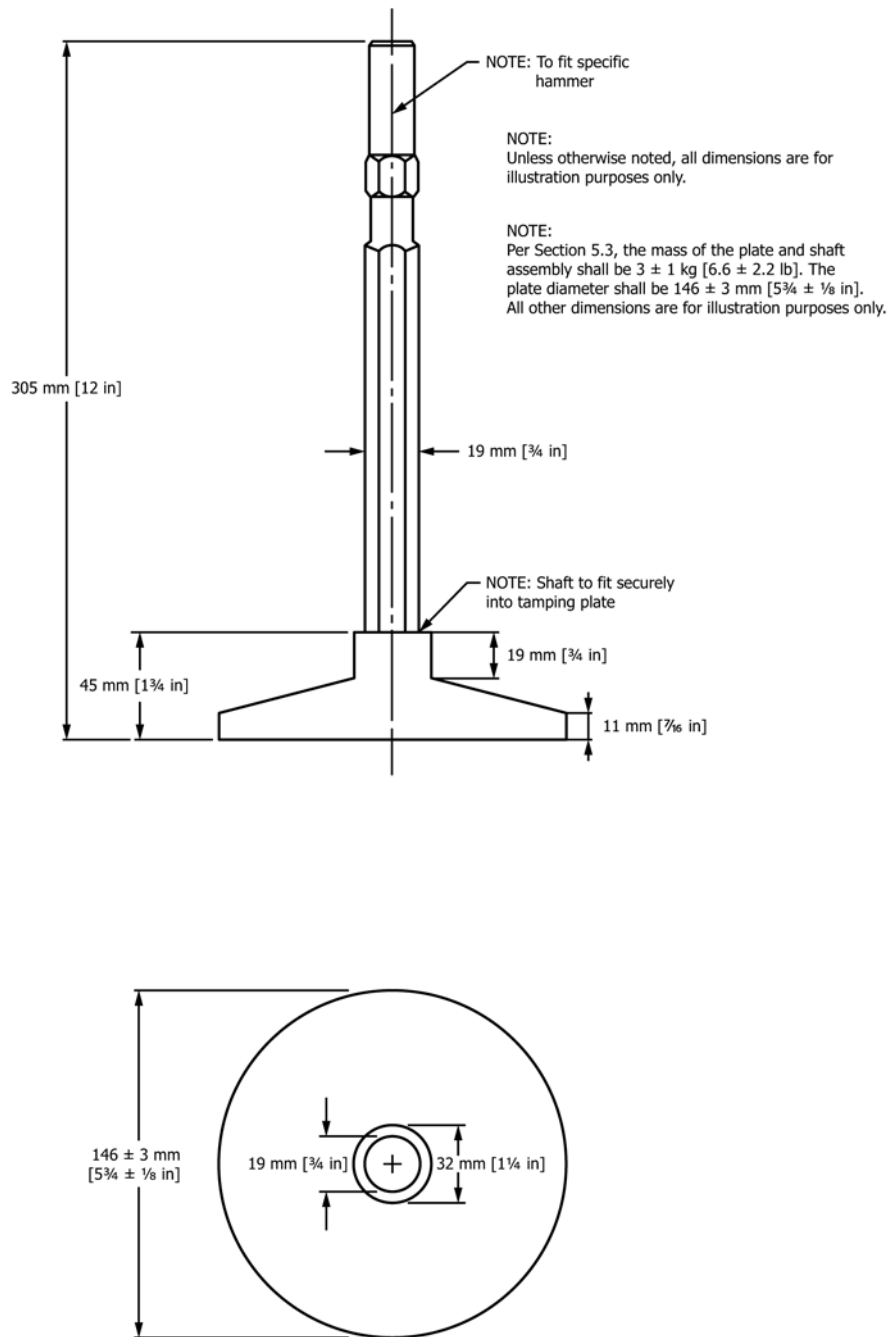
Circular Steel Tamping Plate and Metal Shaft
